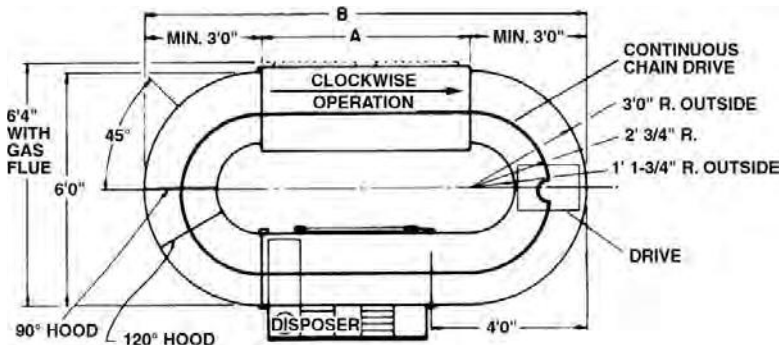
Shows an FRCL_e Series System with a front mounted trough, cross trough and end-mounted disposer. Trough shown with removable sliding grid.
